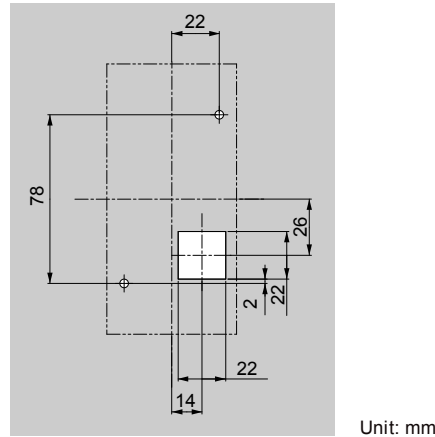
Panel Cut-Out Dimensions (External/Face-Mount Installation)
